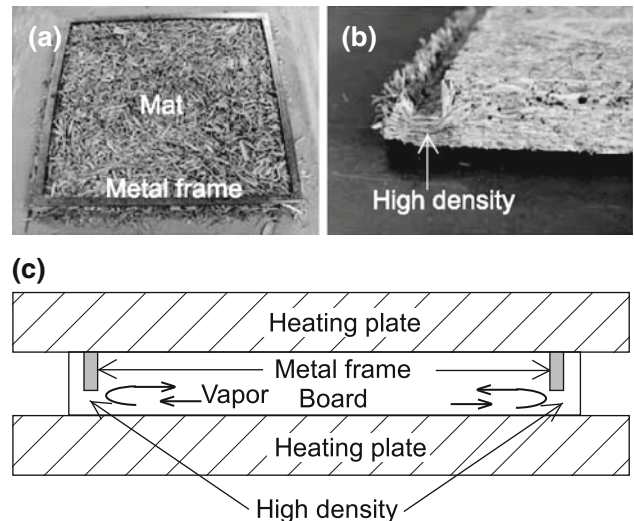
Board with a metal frame and hot press; a board with a metal frame before hot pressing; b edge of the board hot pressed with the metal frame; c cross section of the hot press installed with a metal frame
